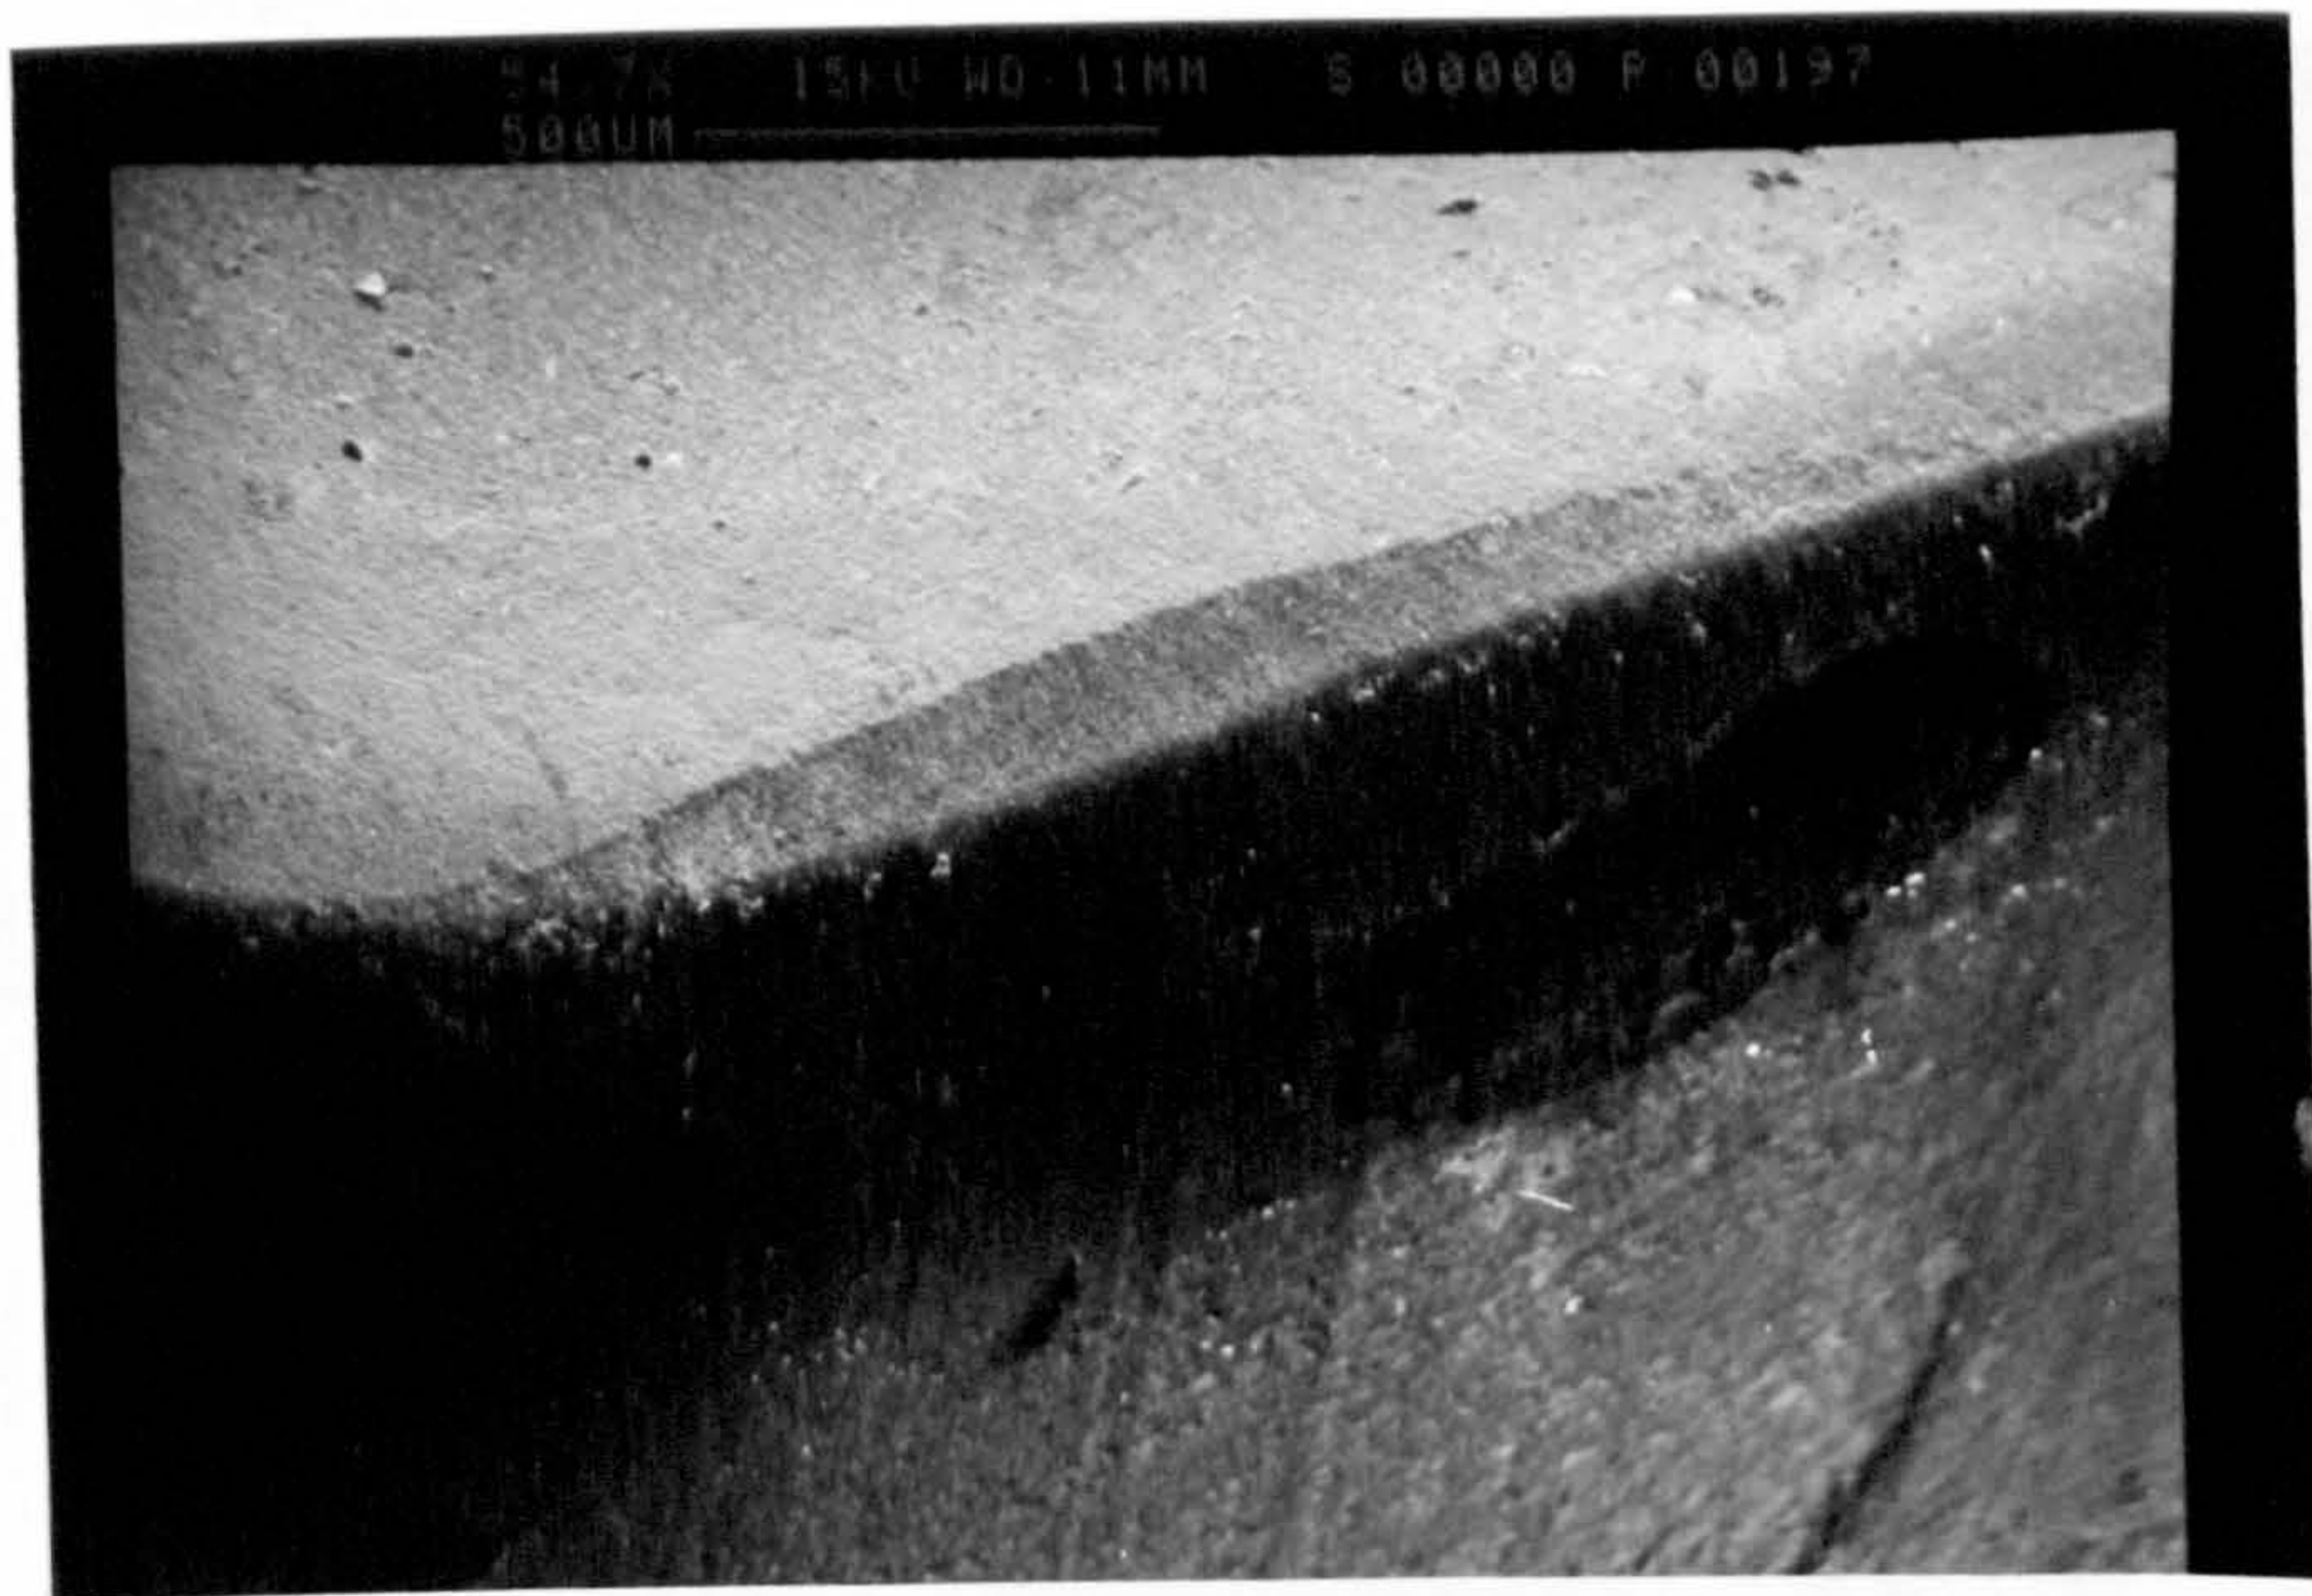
Typical wear pattern of a K20 carbide tool. (Speed = 300 m/min, feed = 0.16 mm/rev, cutting time = 2 min)
